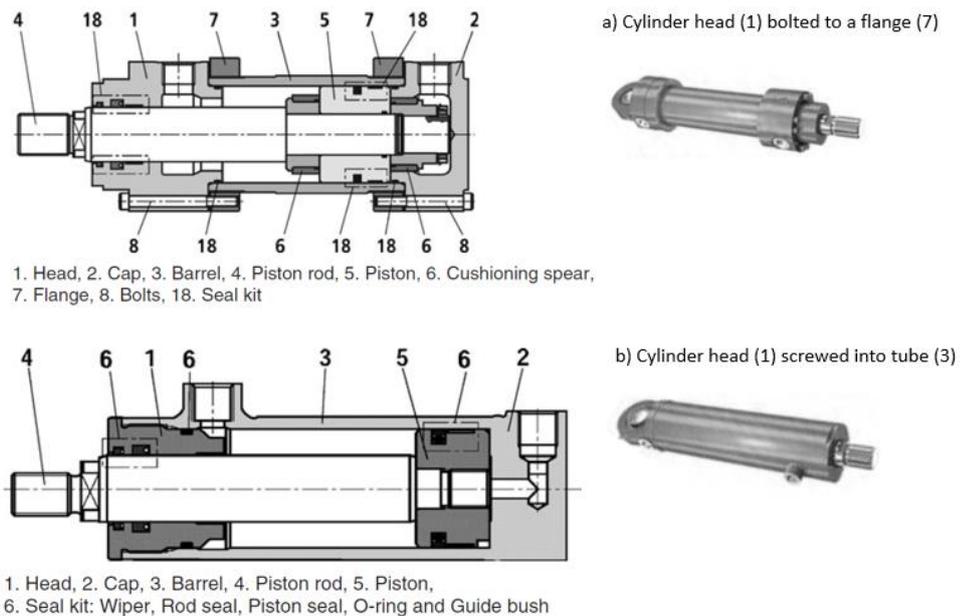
Mill-type cylinder with different assembly options for cylinder head (modified) (Bosch Rexroth; Galal Rabie 2009, p. 253).
